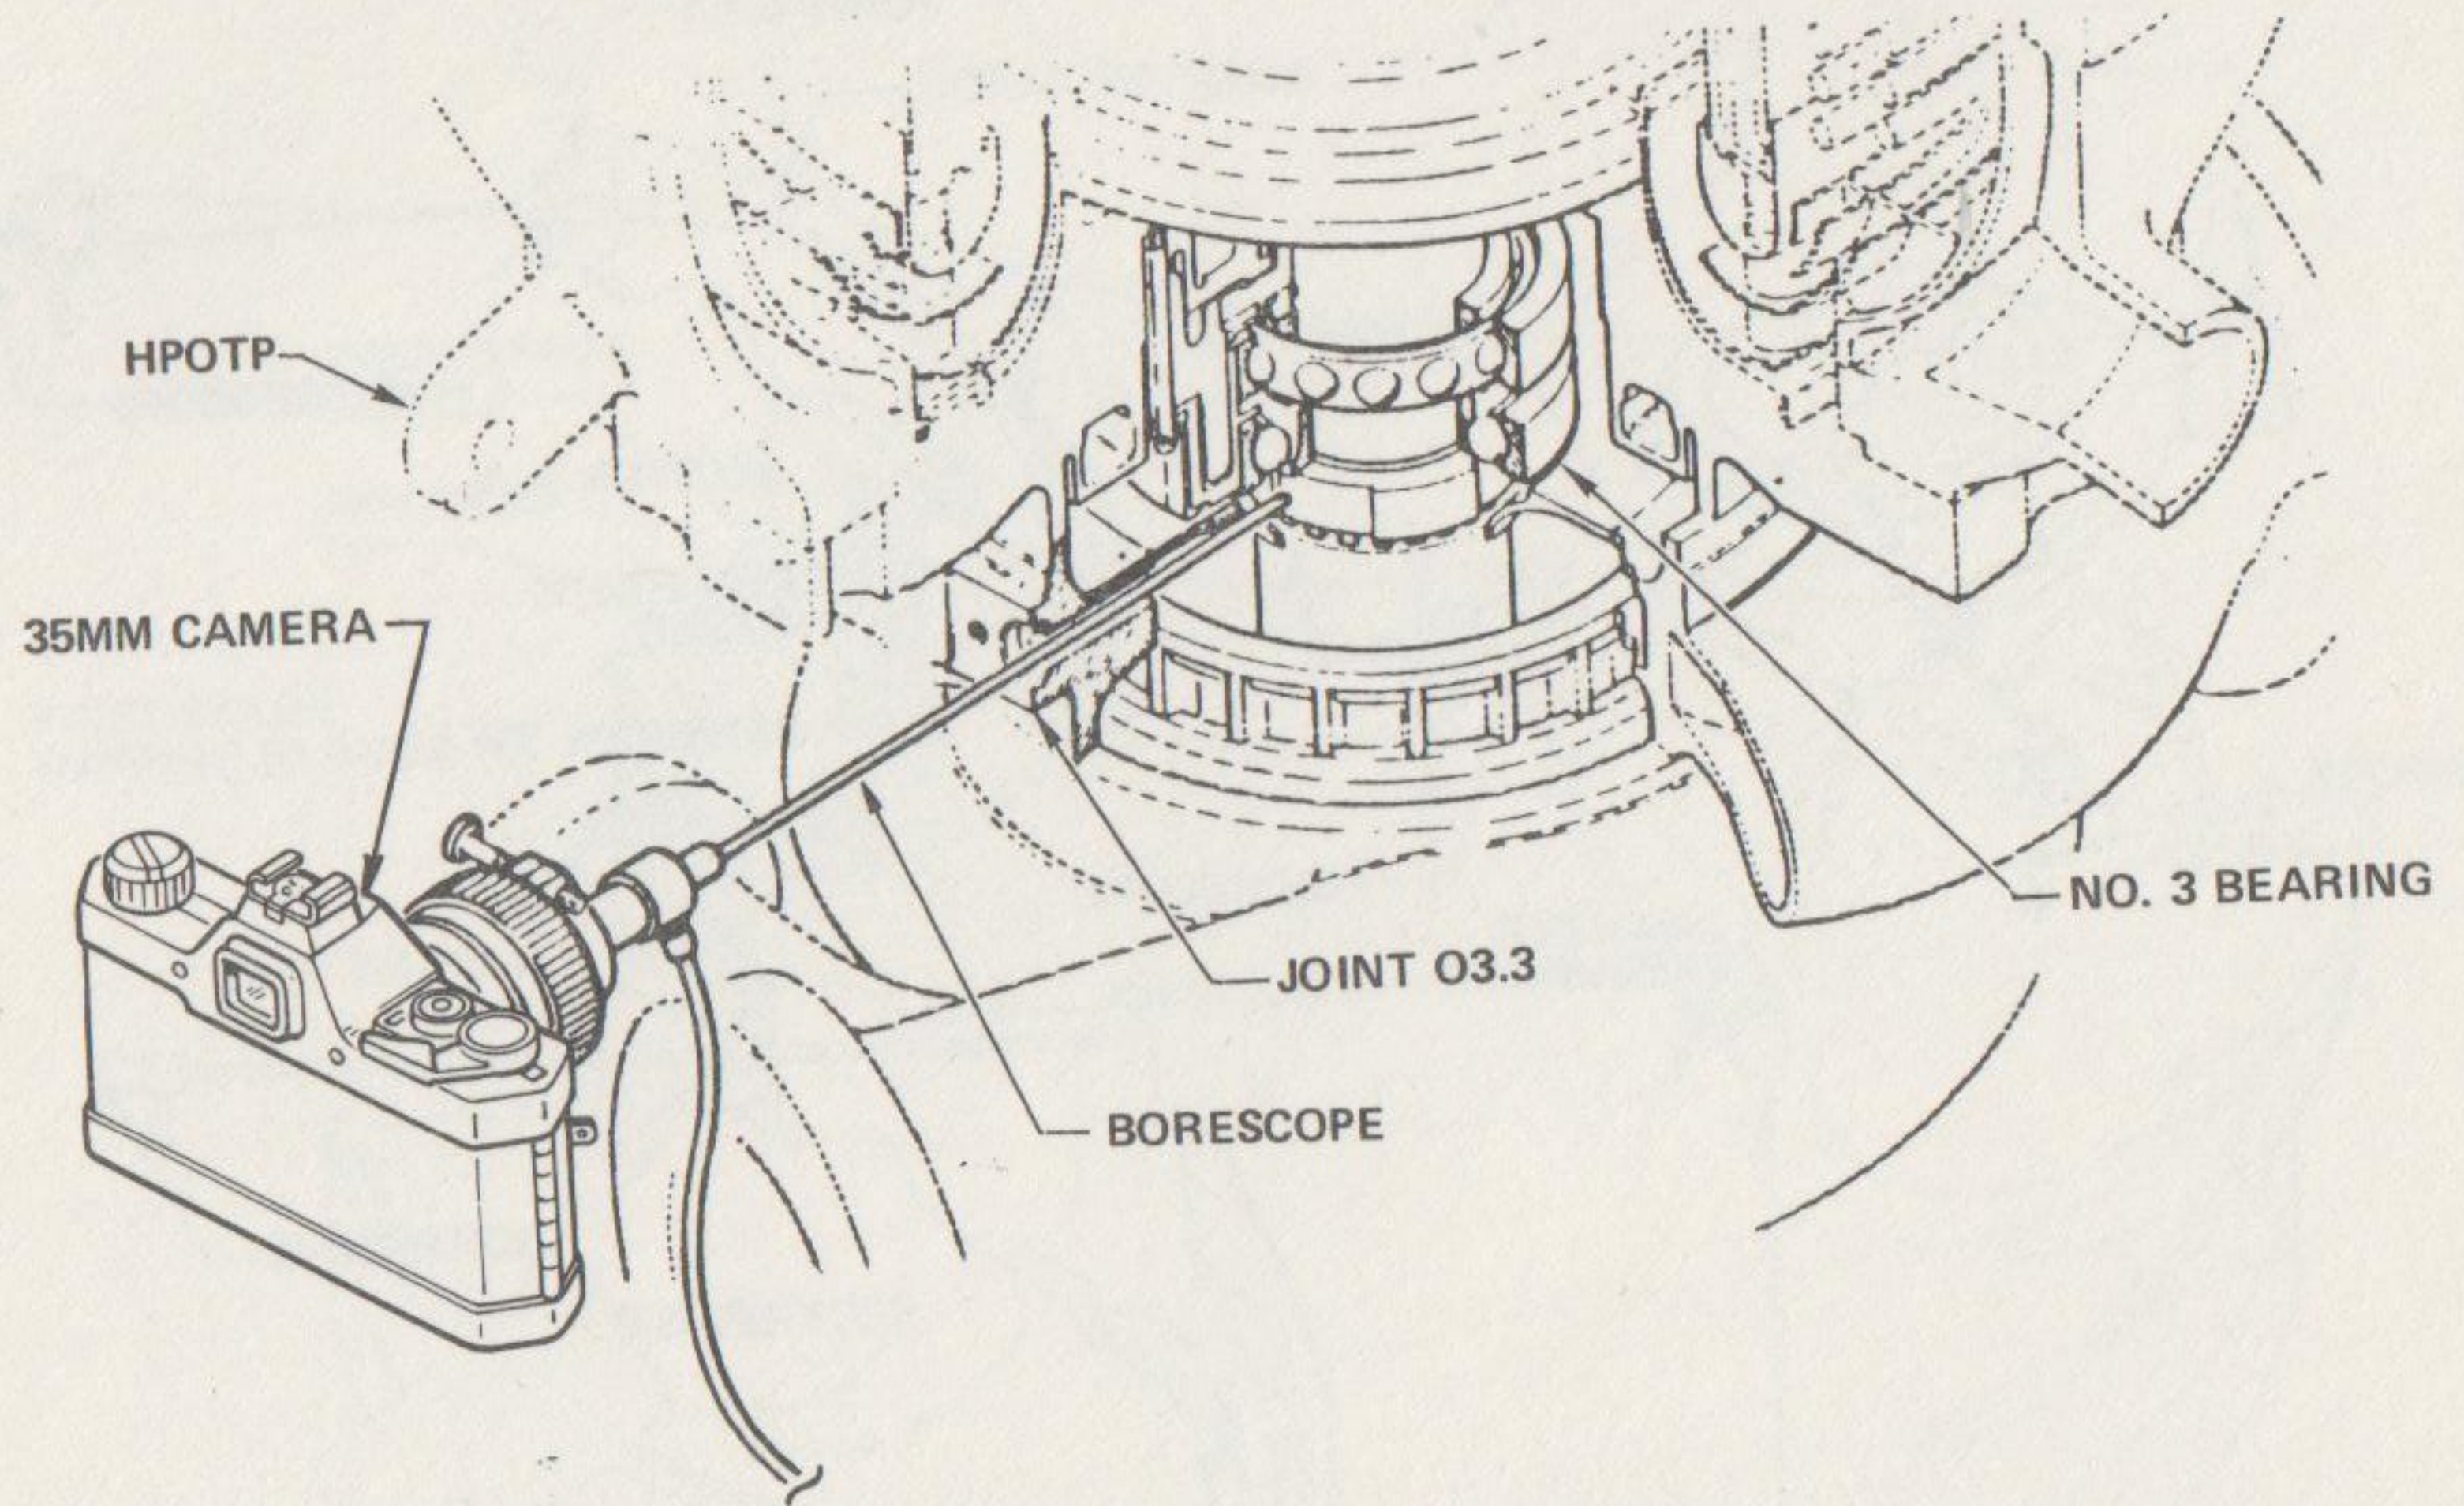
HPOTP NO. 3 BEARING INSPECTION
